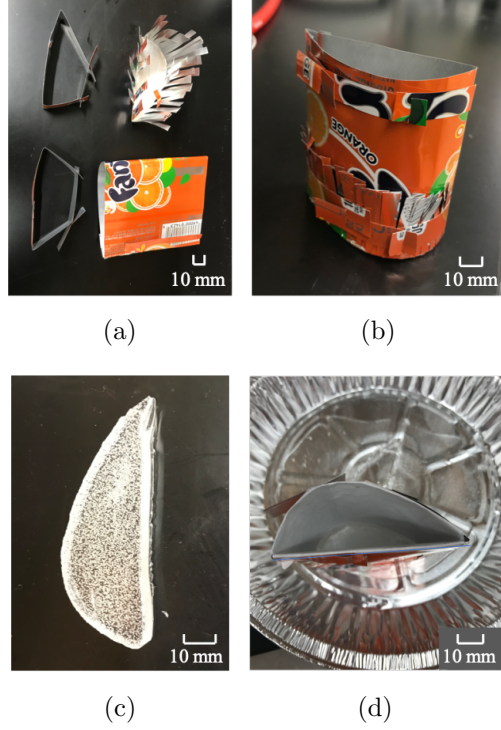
(a) Exploded view of the handmade mold from an aluminum can, (b) The assembled mold for the airfoil-shaped PDMS, (c) Clear 1:10 ratio PDMS that was used as the mold's base, to prevent leaking of the 1:70 ratio PDMS during curing, and (d) The assembled handmade mold with inserted 1:10 ratio PDMS base and parchment paper.
